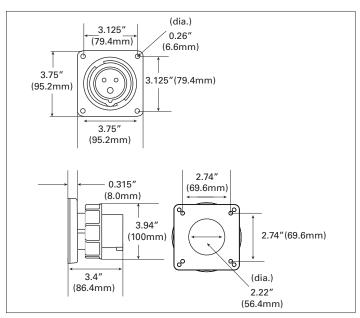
30A & 32A 4-P, 5-W Front, Side & Back View Inlets
